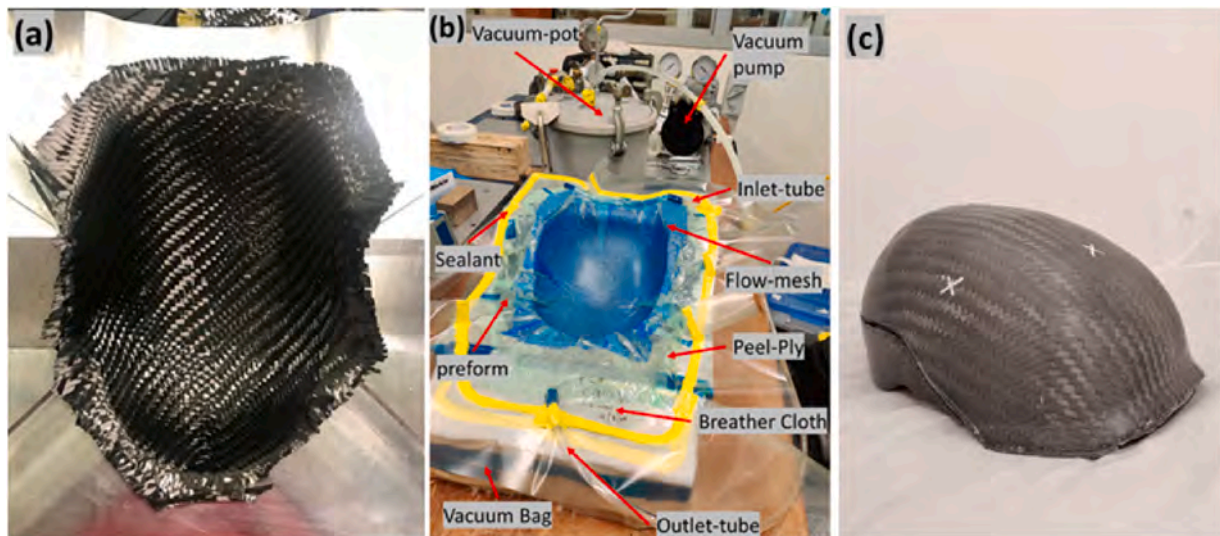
(a) Preform placement into the mold (b) Bagging setup of the infusion process for the helmet shells (c) manufactured composite helmet shell (Reproduced from Gohel et al. [50]).
